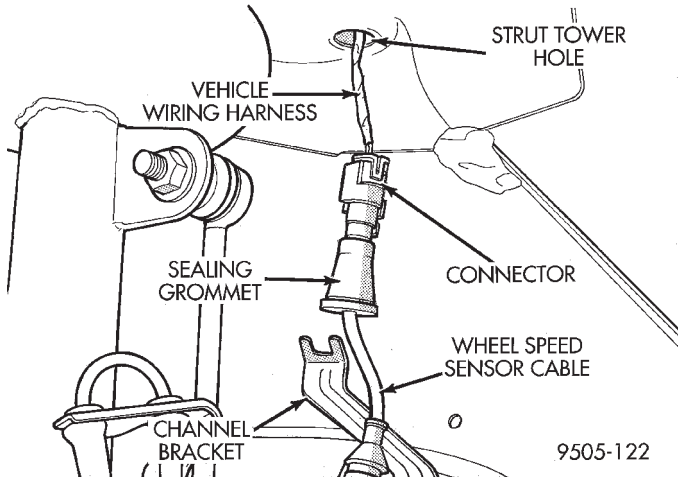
Speed Sensor Cable To Vehicle Wiring Harness
